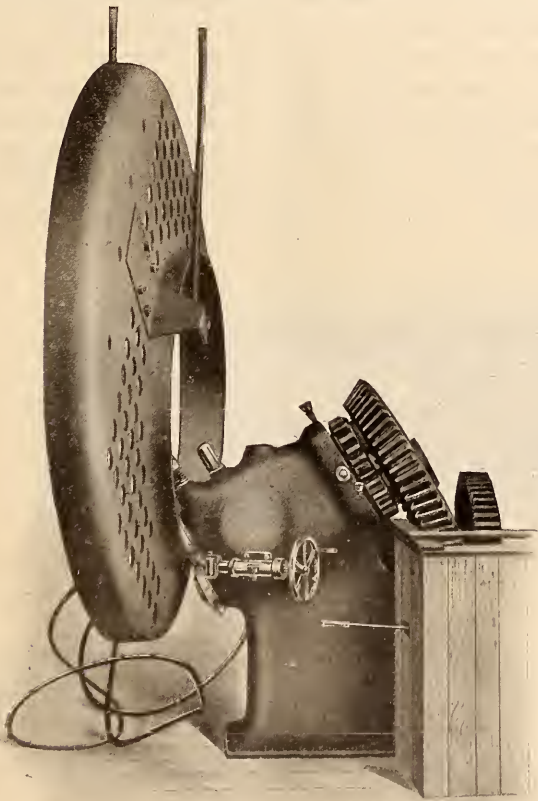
BEVELING THE FURNACE FLANGE OF A BOILER HEAD.
